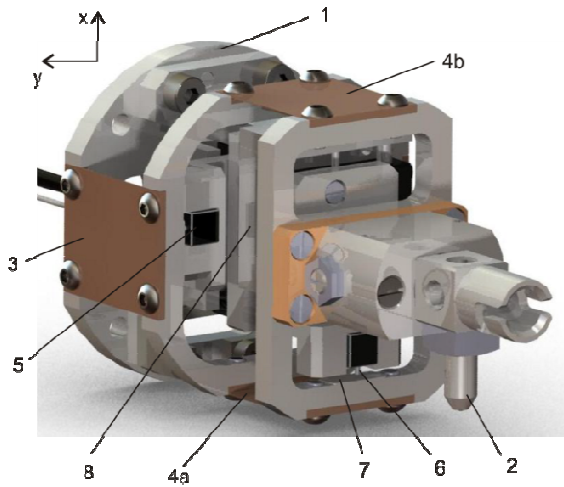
UHV compatible 2-axes force sensor. 1 – the base plate; 2 – the pin; 3 – one of two leaf springs used for measuring y component of the force; 4a and 4b – the leaf springs for measuring x component of the force; 5, 6 – bundle optical fibre displacement sensors; 7 – mirror of the x -stage; 8 – microactuator for positioning of the optical sensor of the y -stage.
